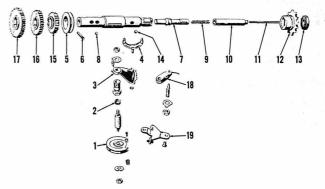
Exploded view of three speed transmission output shaft and gears.
